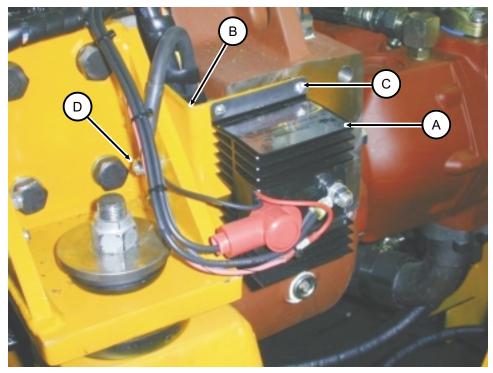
EXISTING MOUNTING OF SOLENOID AND BRACKET
